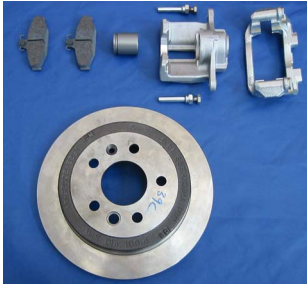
(b) Individual brake components: pads, piston, pins, calliper housing, anchor bracket and rotor (clockwise from top).
